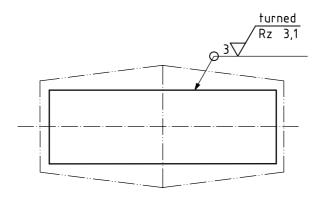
Indication of surface texture requirements for "final" workpiece (including requirement for 3 mm machining allowance for all surfaces)
